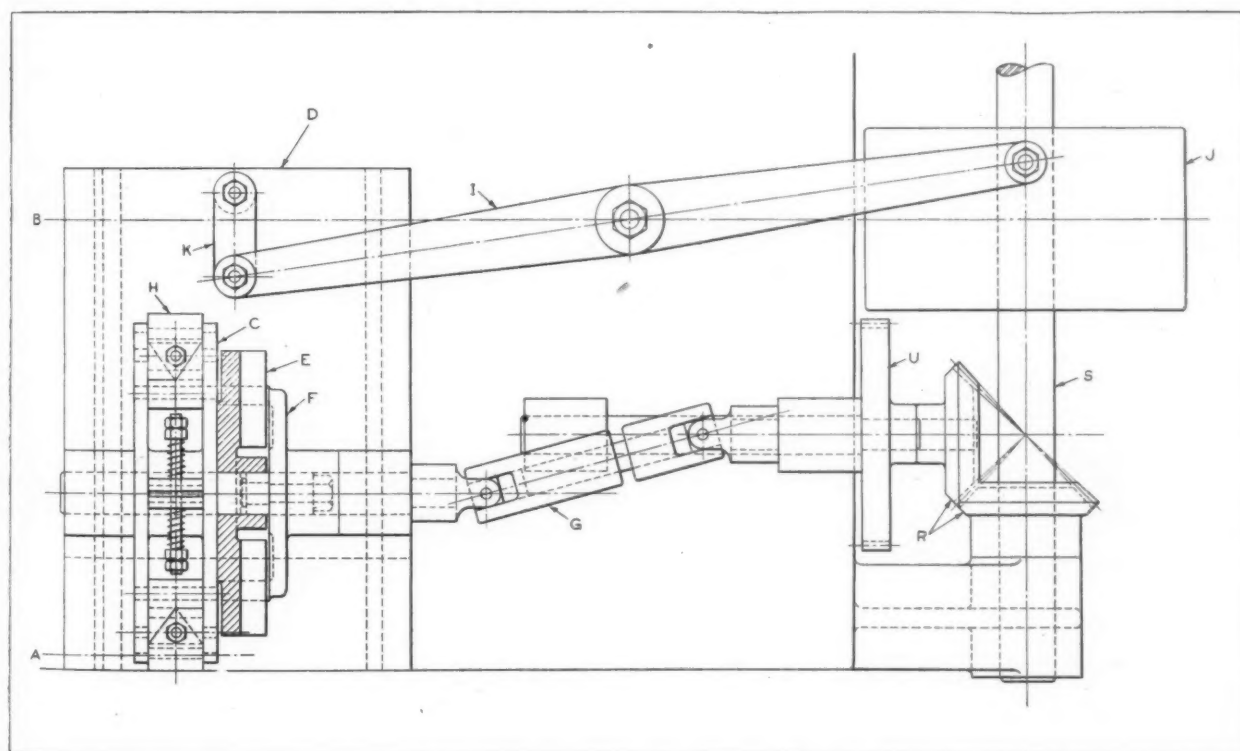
Plan View of Mechanism Shown in Figs. 1 and 2
